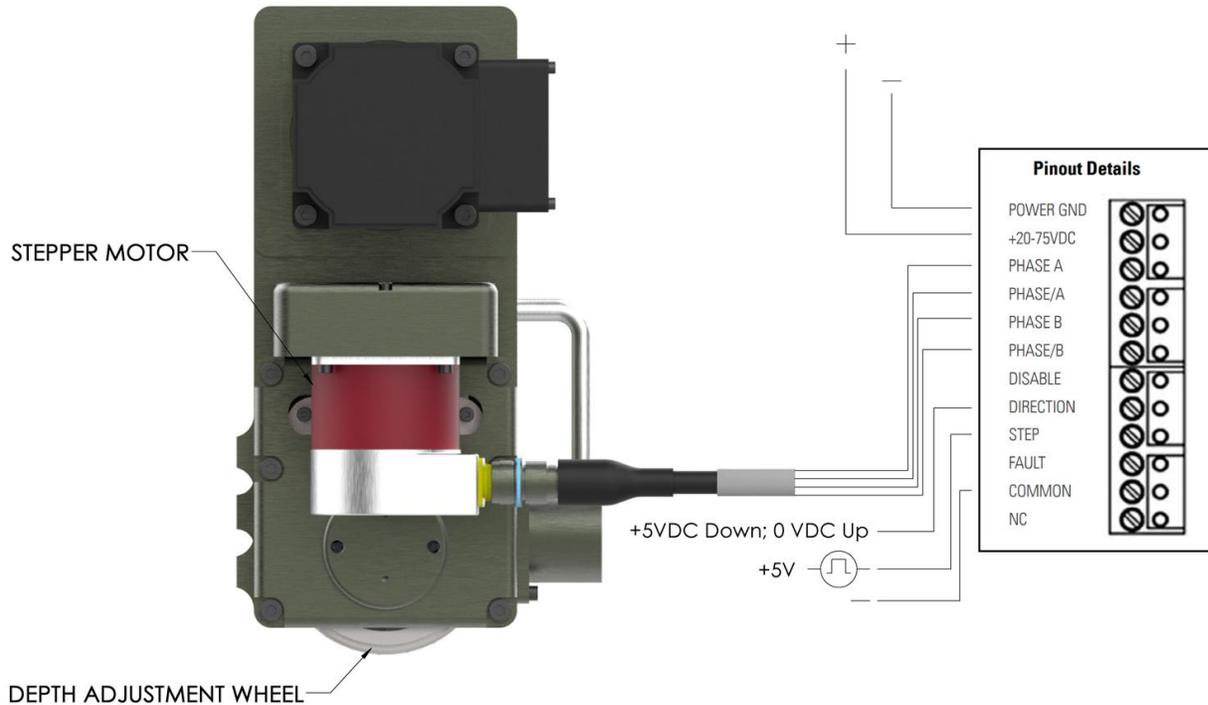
REMOTE DEPTH OF CUT ADJUSTMENT
